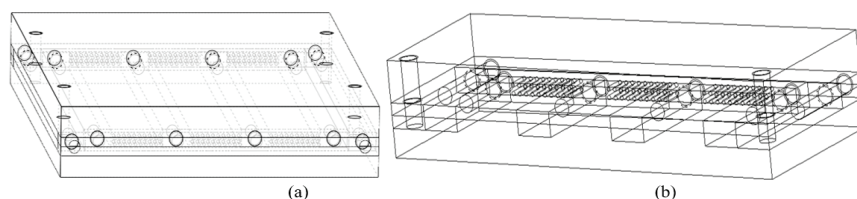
The fabricated mold for the test pieces showing (a) The entire mold assemblage (b) The fiber holes within the mold.
